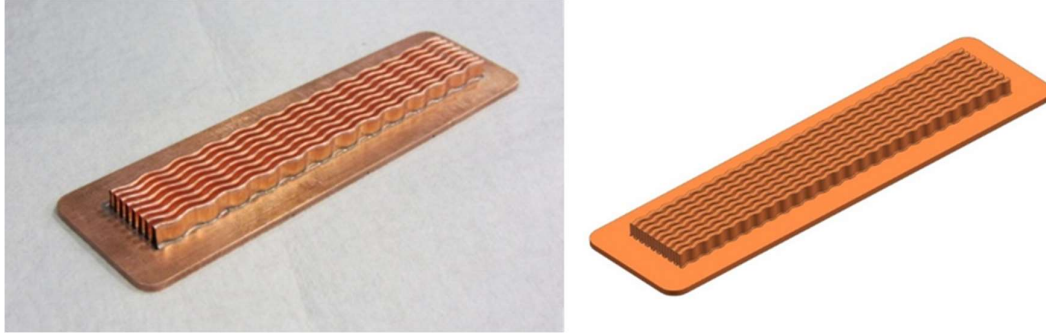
Prototype (left) and preferred (right) folded fin cold plate designs.
